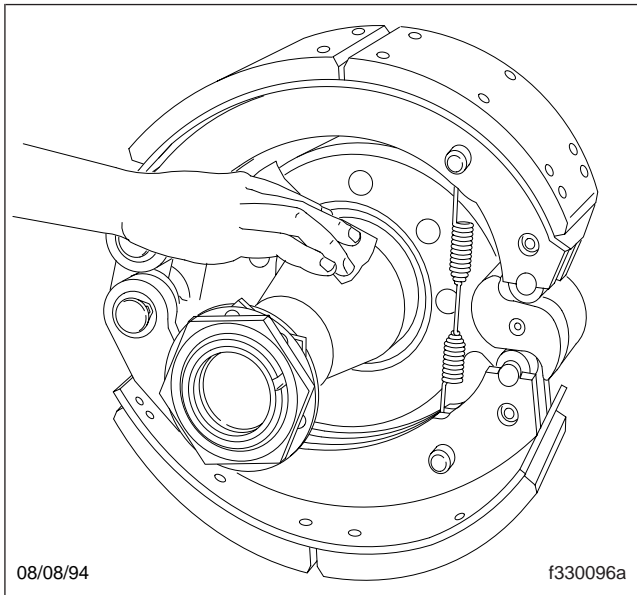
, Clean and Inspect the Axle Spindle
